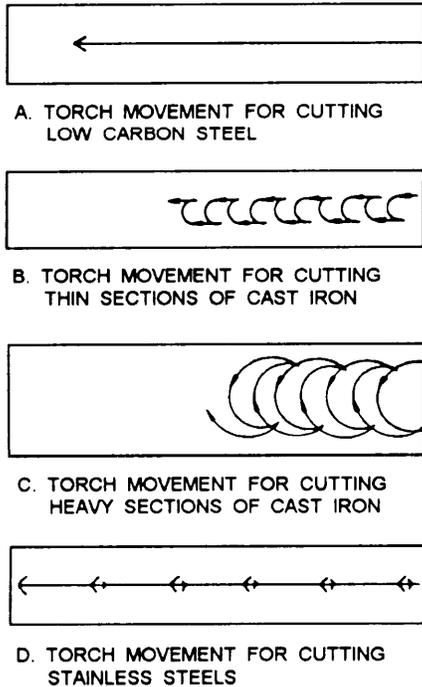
Manipulation of the oxyacetylene cutting torch.
